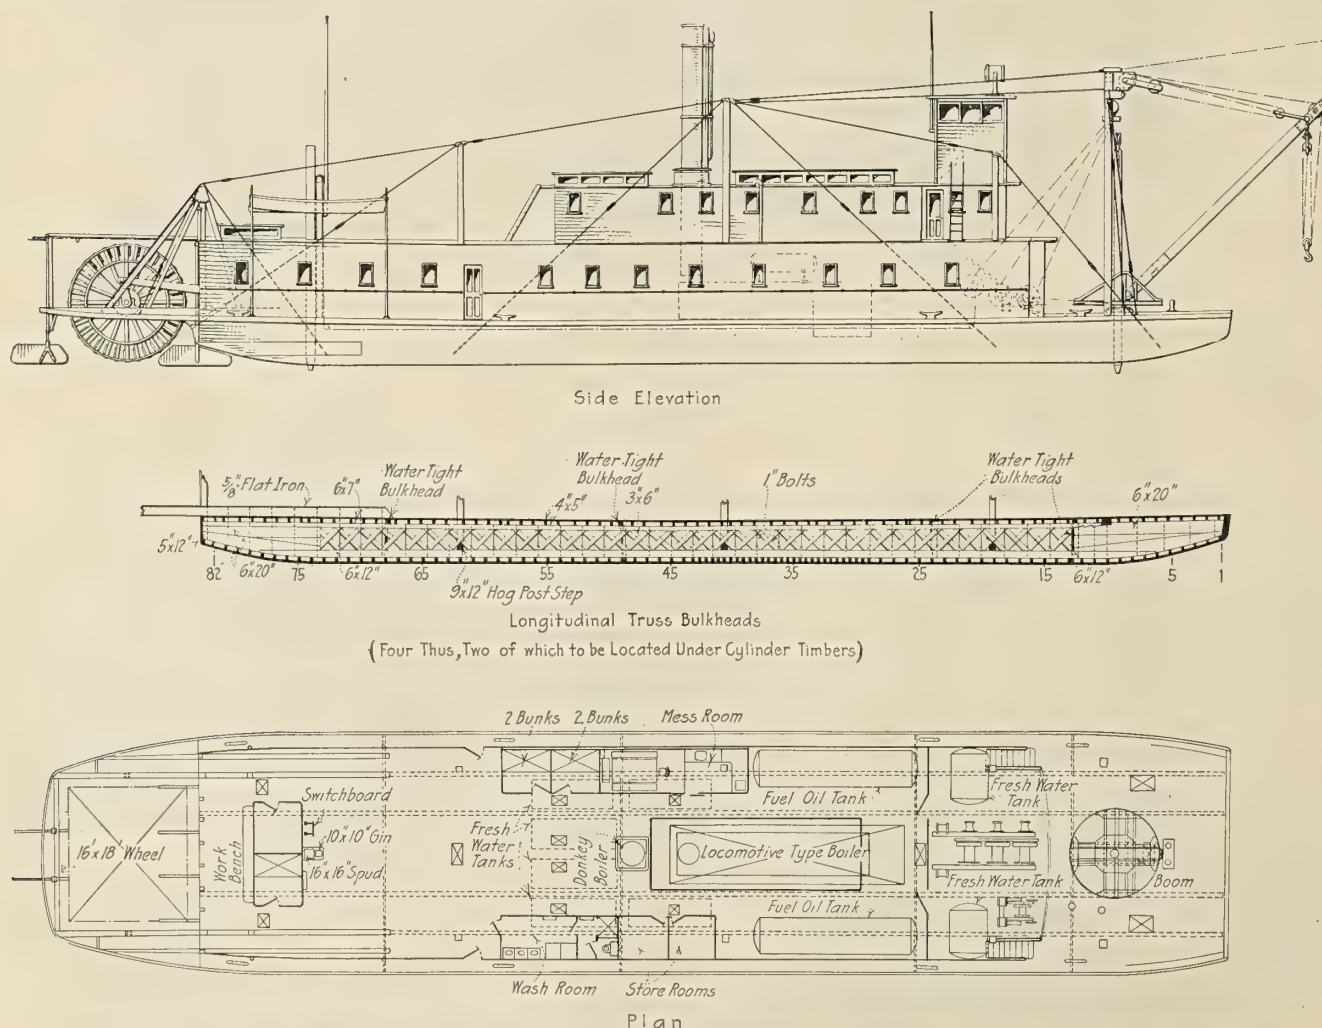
Profile and Deck Plan of the *Swinomish* and Section of Longitudinal Truss Bulkhead, Four of Which Are Fitted, Two Under the Cylinder Timbers
